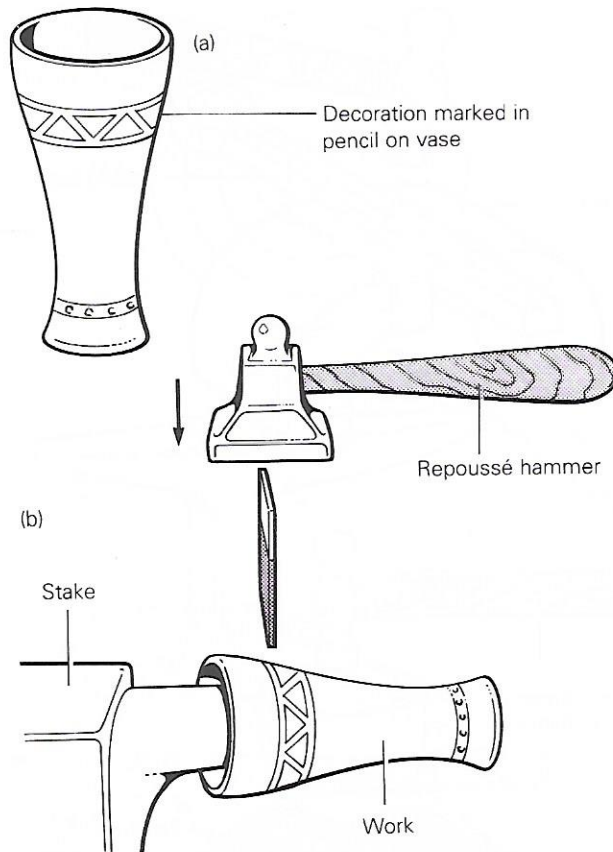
Chasing: (a) marking out decorations on vase; (b) chasing.
